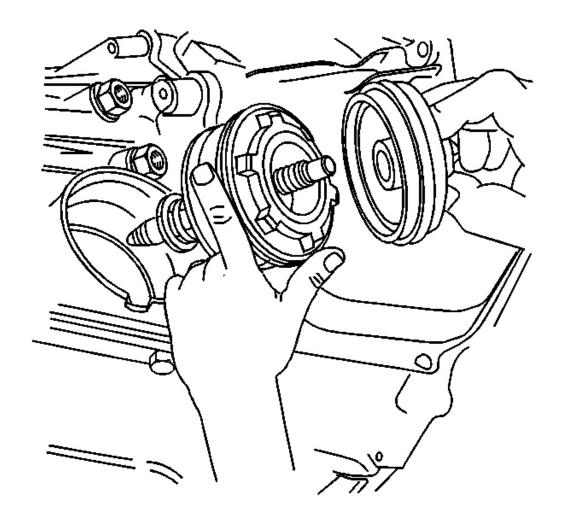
View Of 2-4 Servo Courtesy of GENERAL MOTORS CORP.
